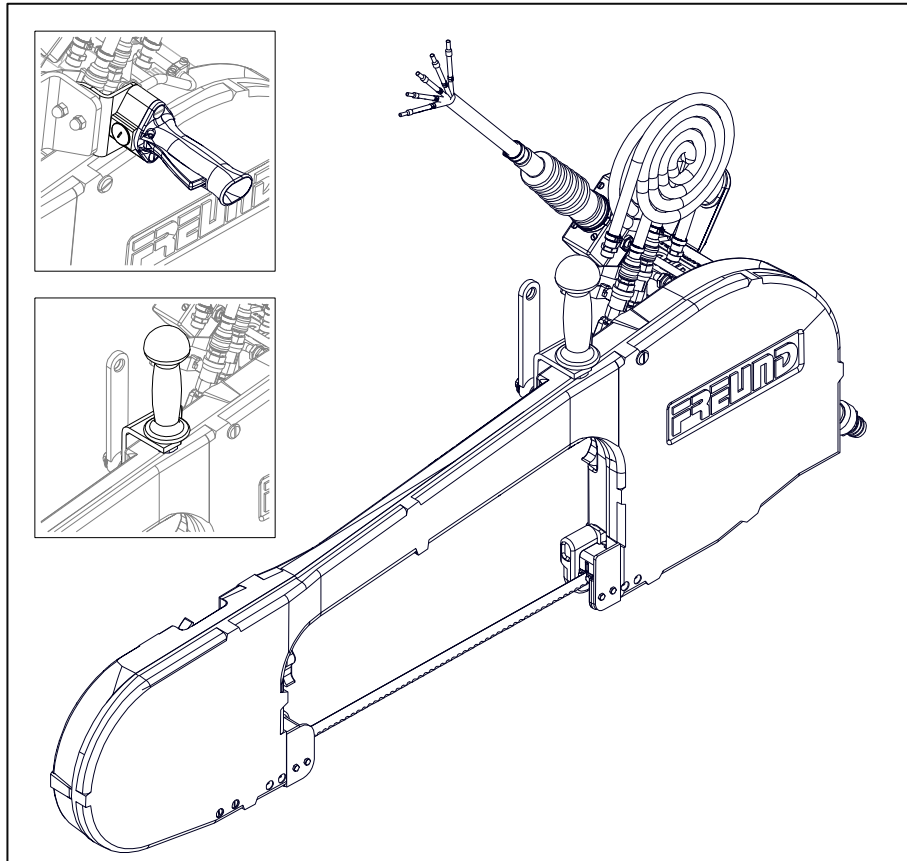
View of standard machine SB49-08 with detailed view of handle
